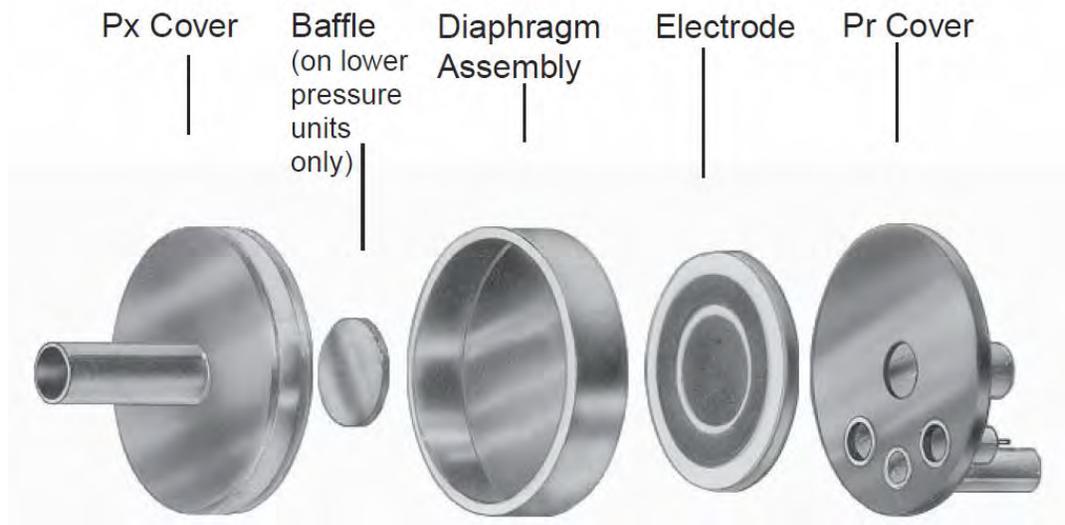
Exploded View of a MKS Capacitance Manometer Sensor
